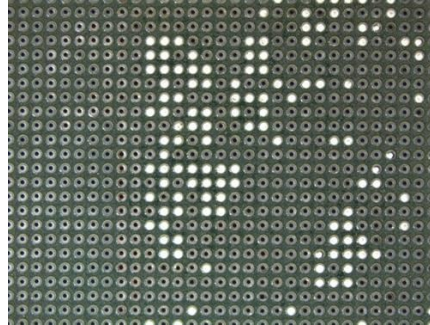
Board assembled with ROL0 wave soldering flux after 5 days MFG test
